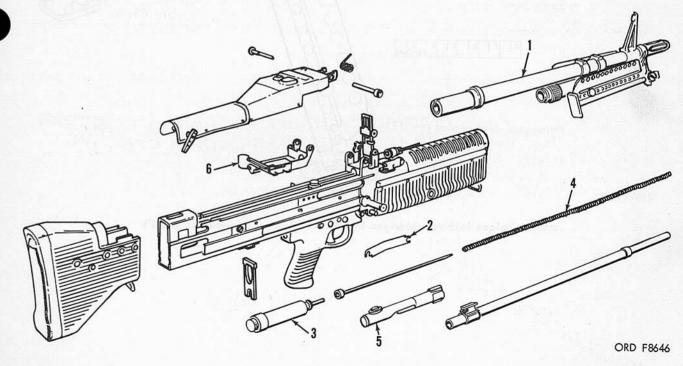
Major assemblies and components for machine gun M60 - partial exploded view.
